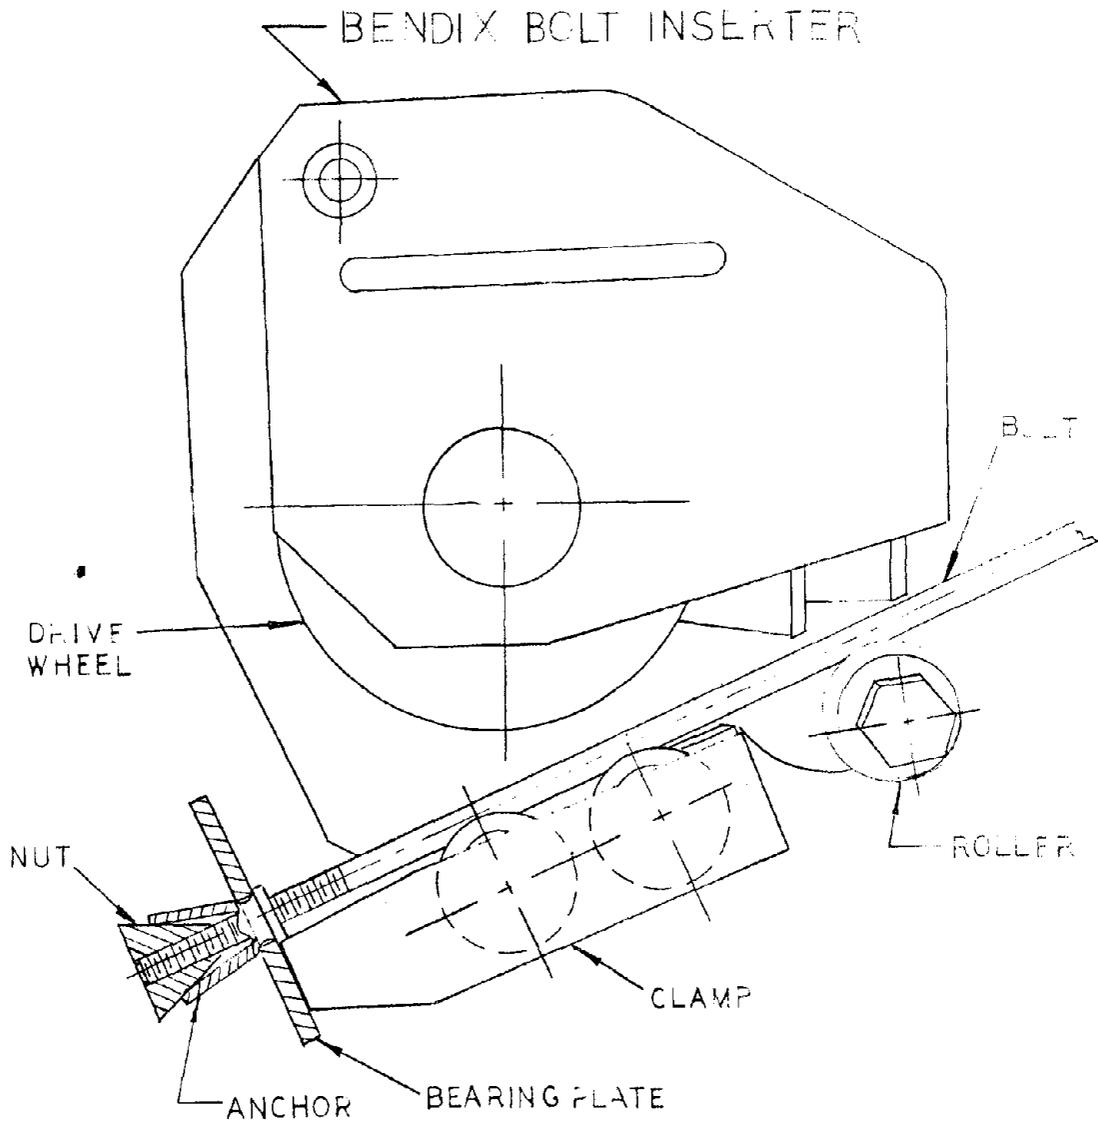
Bendix Bolt Inserter Loading Method No. 5
